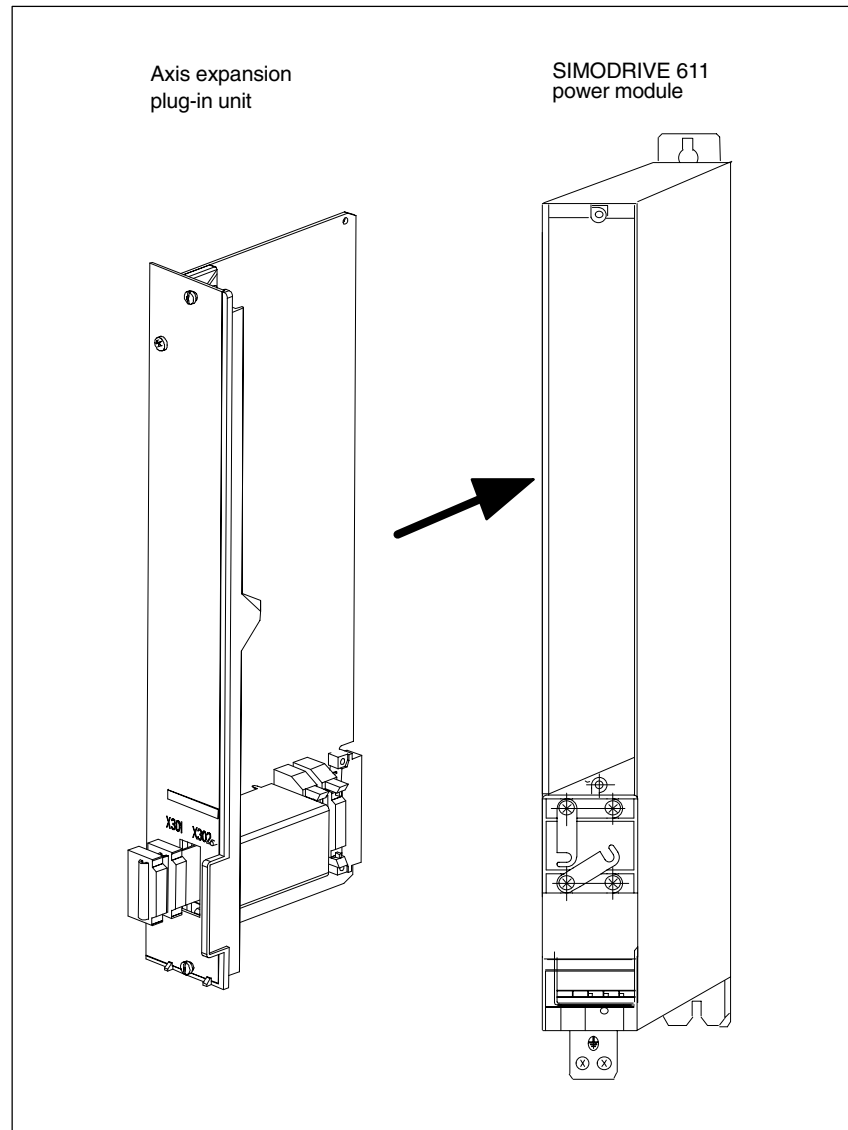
Mounting the axis expansion plug-in unit in the power module
